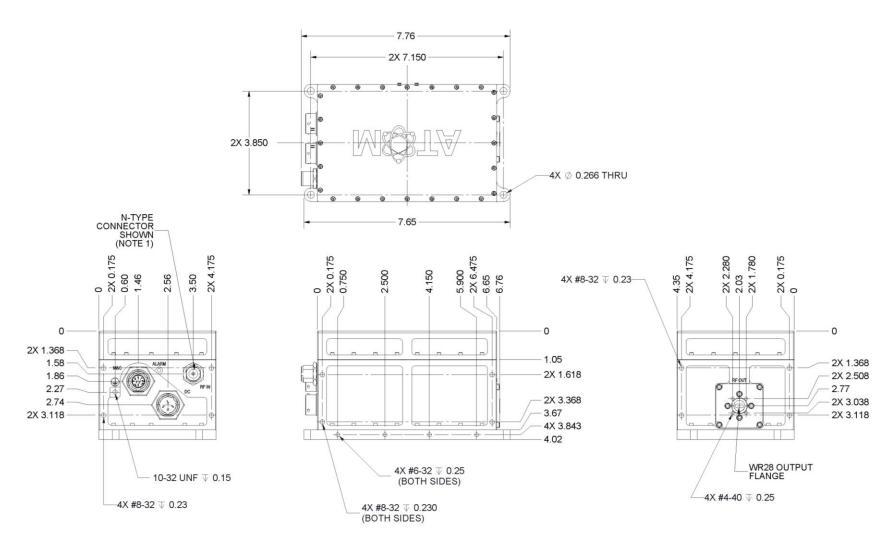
50W Ka BUC/SSPA, Baseplate Cooled
